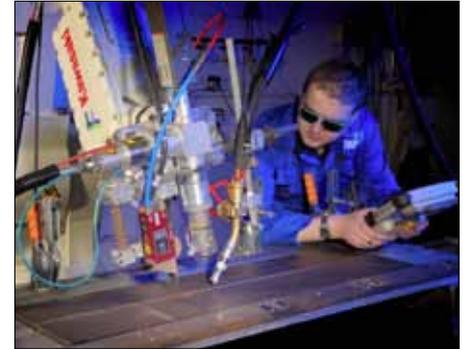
A laser vision sensor mounted ahead of a hybrid welding process.
